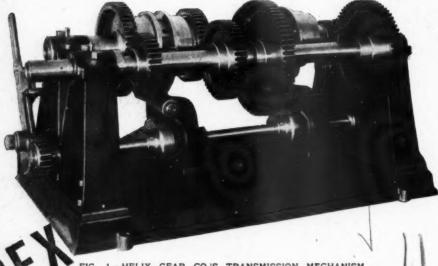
HELIX GEAR CO.'S TRANSMISSION MECHANISM.
